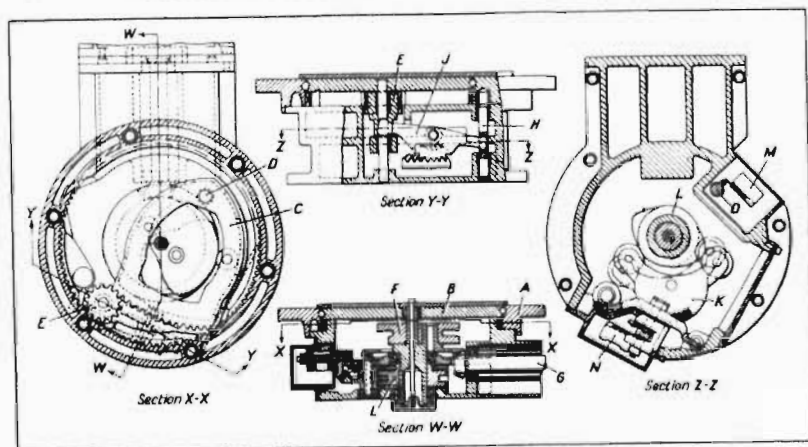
Sectional views of work-table that can be set up for automatic indexing. Limit switch *M* stops indexing cycle and switch *N* starts machining cycle.
